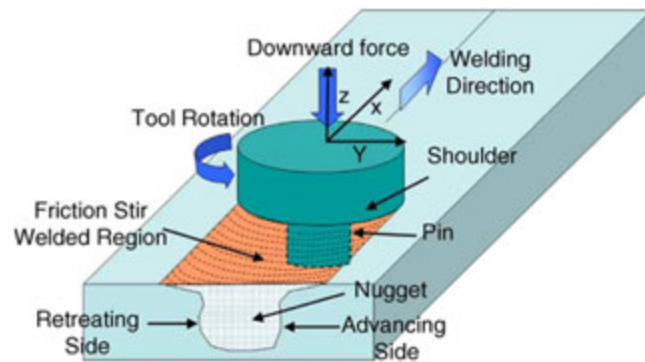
Schematic of the friction stir welding process. Reproduced from Mishra, R.S., Ma, Z.Y., 2005. Friction stir welding and processing. *Materials Science and Engineering: R: Reports* 50 (1–2), 1–78.
